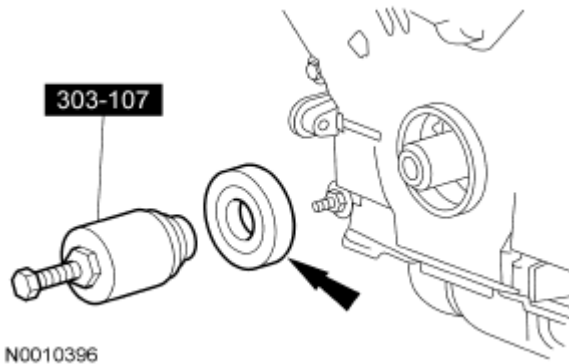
Locating Special Tool And Crankshaft Front Oil Seal
